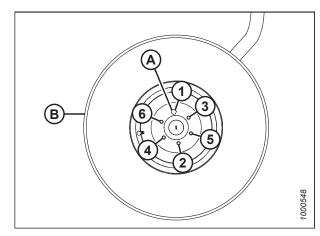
Formed Caster Wheel Bolt Tightening Sequence
